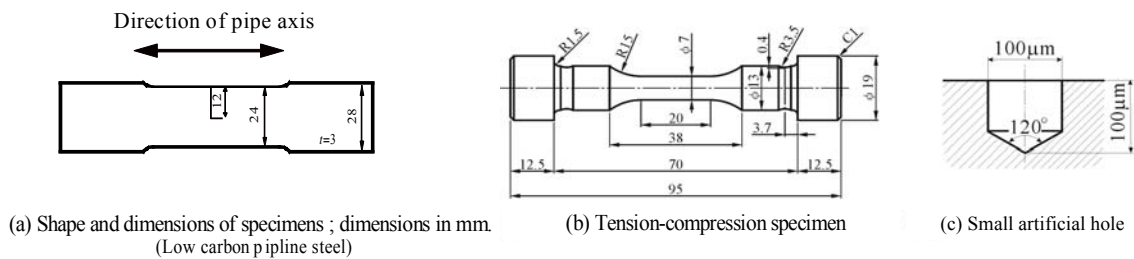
Dimensions, in mm, of the fatigue test specimen and drilled hole introduced to specimen(b). Unit in mm.
